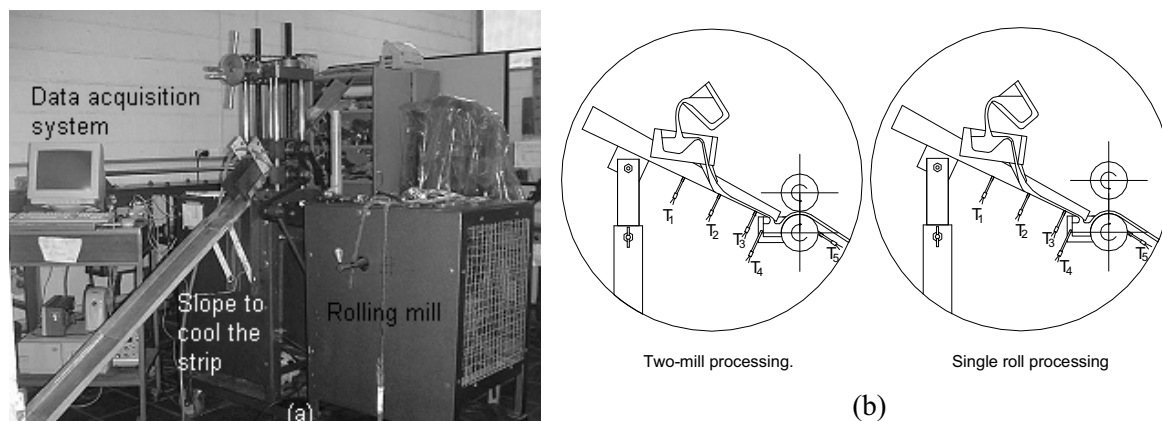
Rolling mill for semi solid strip casting (a) using single roll and two high-mill as indicated (b). At the mill stand exit there is an intense cooling of the hot strip surface by a water shower. T_1 , T_2 , T_3 , T_4 and T_5 are thermocouples type K in 3 mm in diameter. A piece of graphite is molded to fit the thermocouple to measure the temperature of the lower roll during processing.
